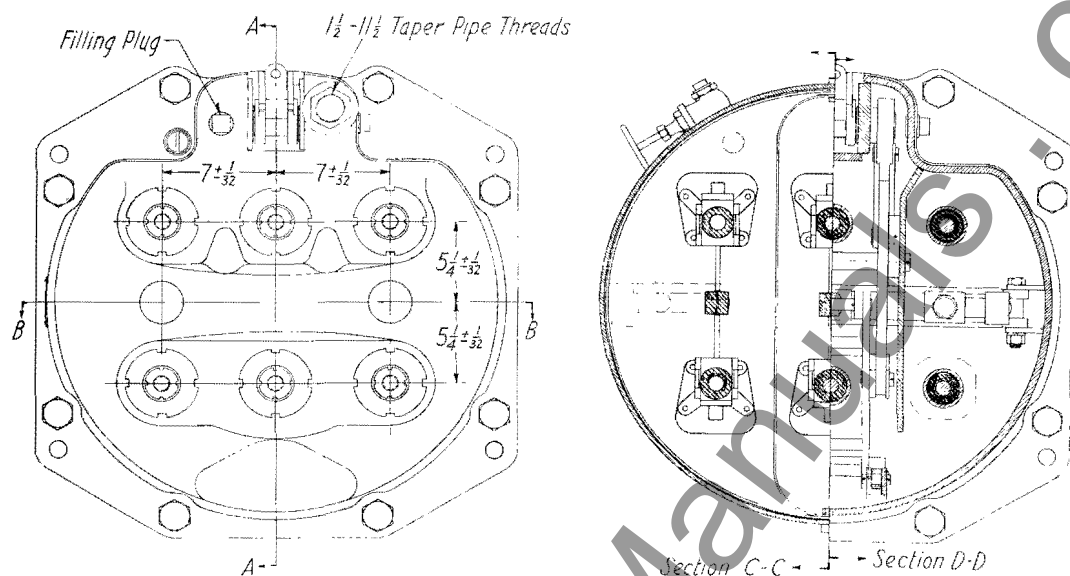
TOP AND SECTIONAL VIEWS FOR TYPE B-28-B CIRCUIT-BREAKER
